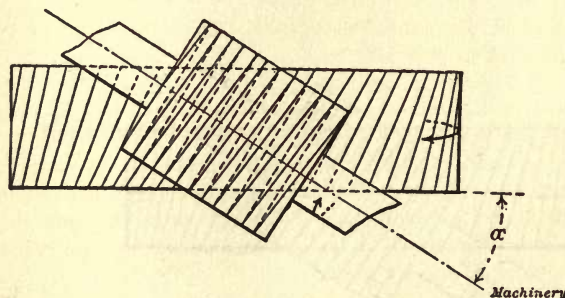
Cutting a Right-hand Spiral Gear with a Left-hand Hob
